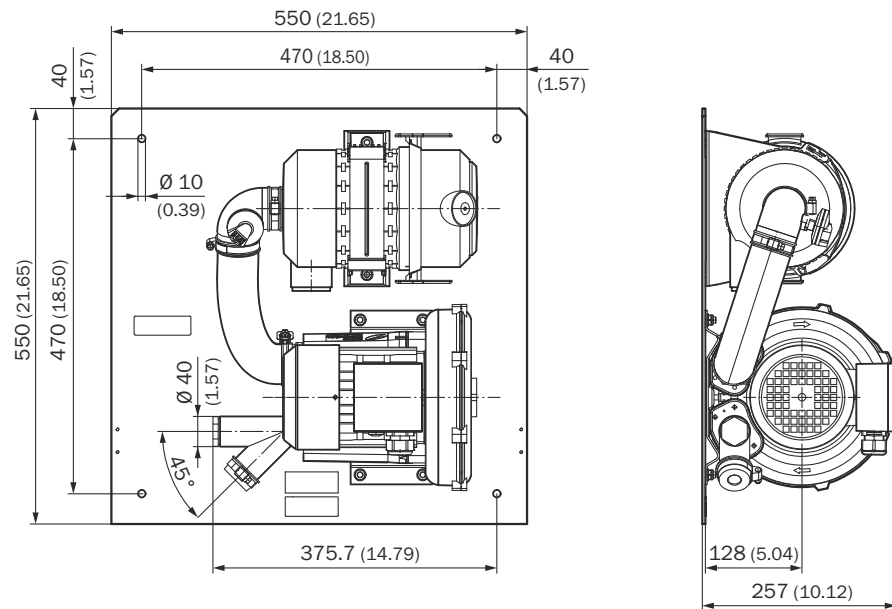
Dimension drawing SLV4-2, type 2BH1300 (dimensions in mm)
